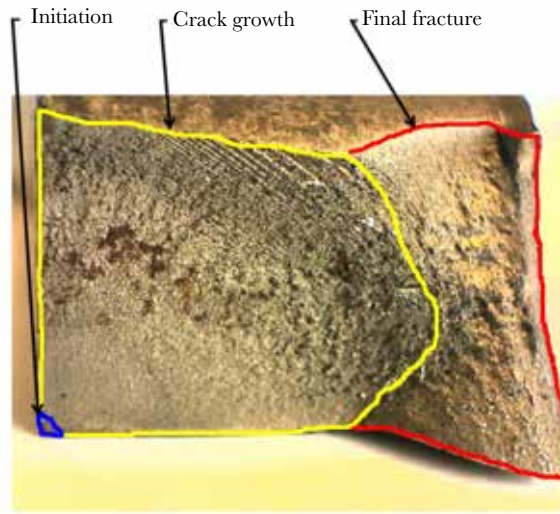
The fracture surface of a steel specimen, with the three stages of fatigue fracture being visible.
